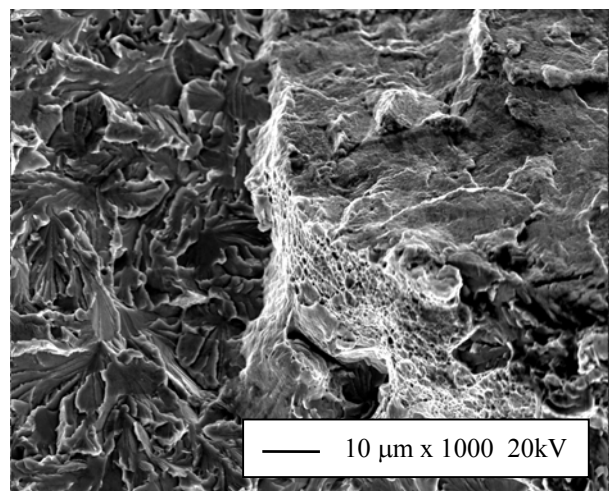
(d) Transition zone between fatigue and fast fracture surfaces
